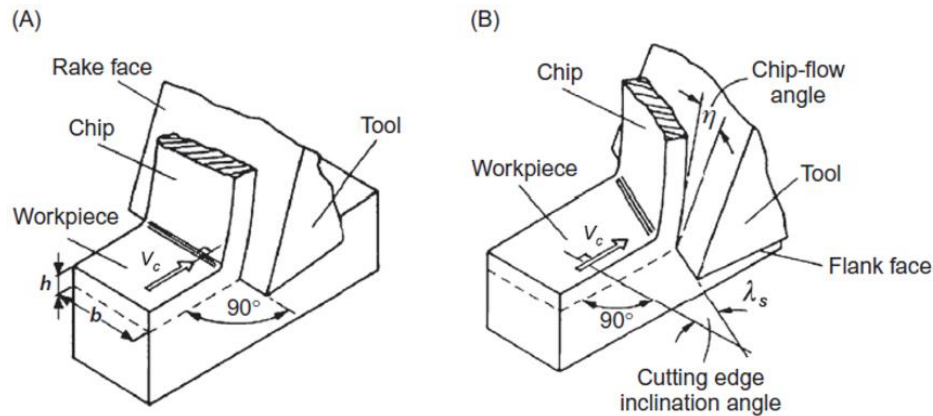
Geometries of (A) orthogonal and (B) oblique cutting processes with straight cutting edge [23].
